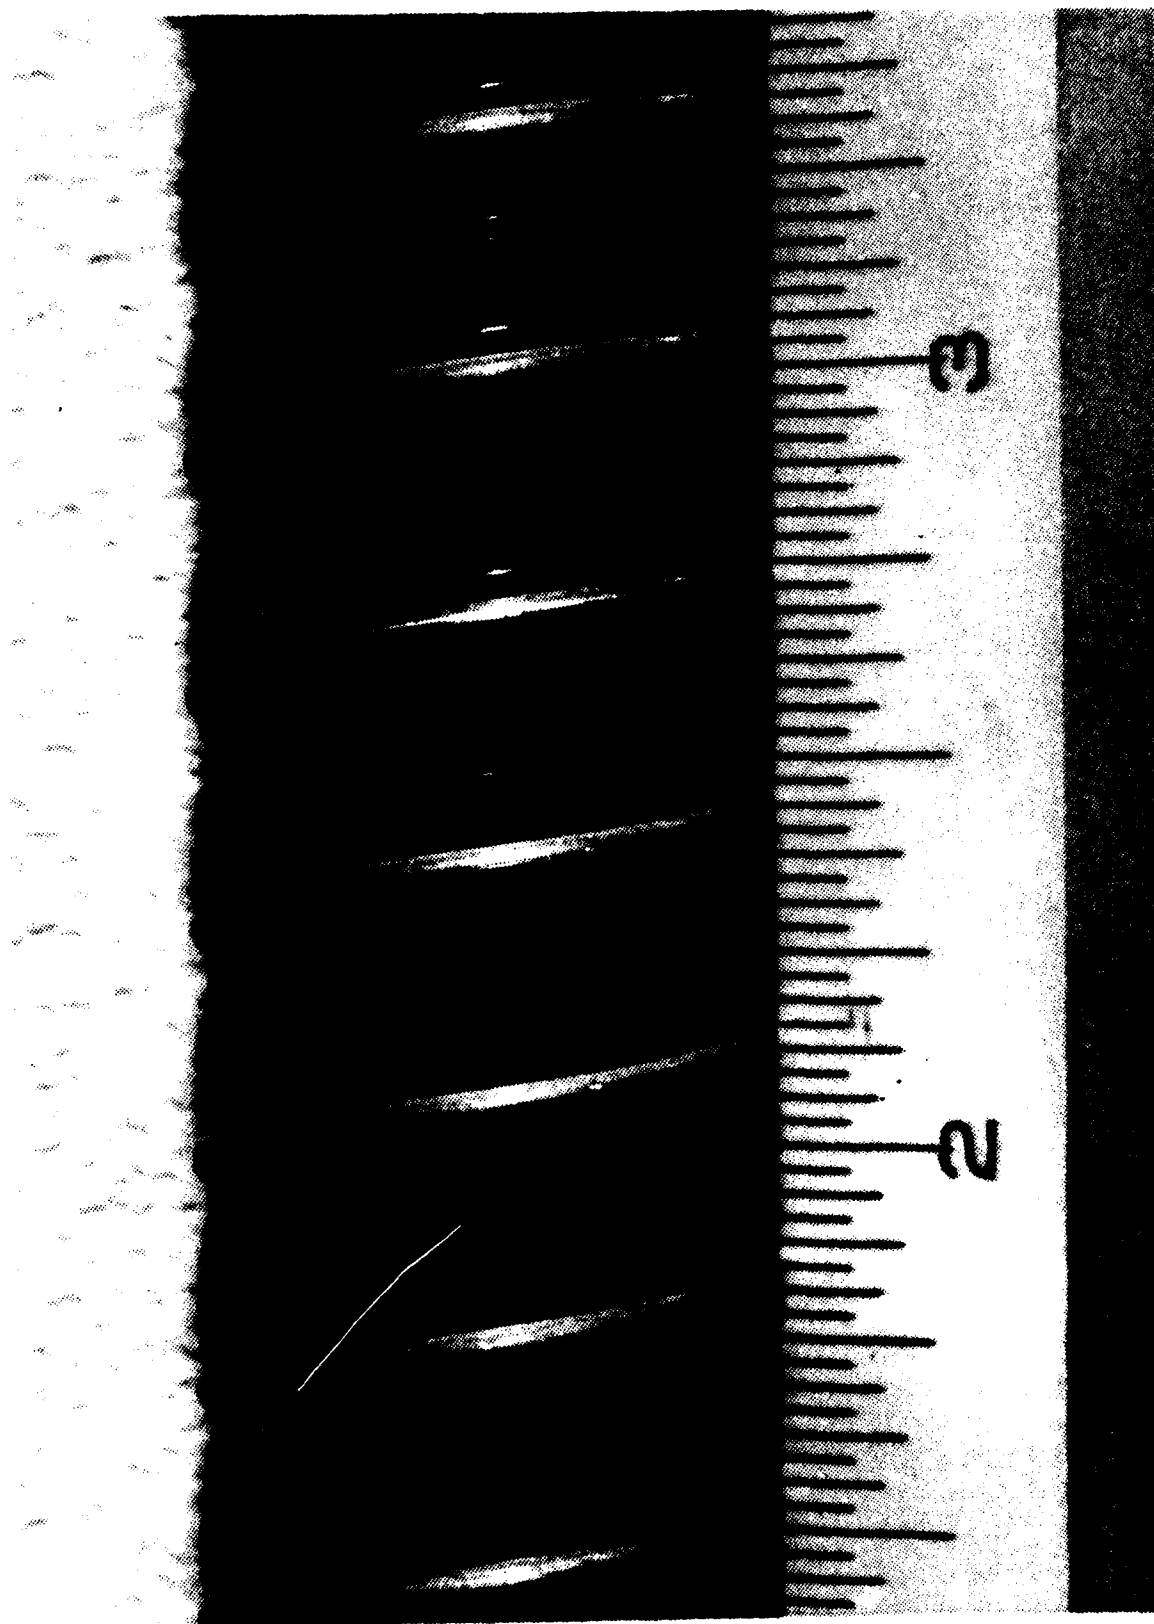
Photograph of Wire Wrapped Smooth Titanium Tube
